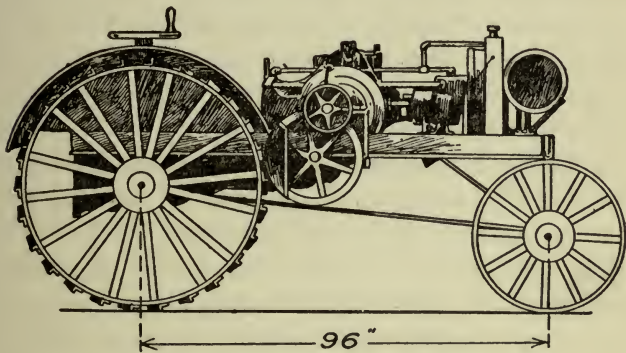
THE WHEEL BASE OF A TRACTOR
